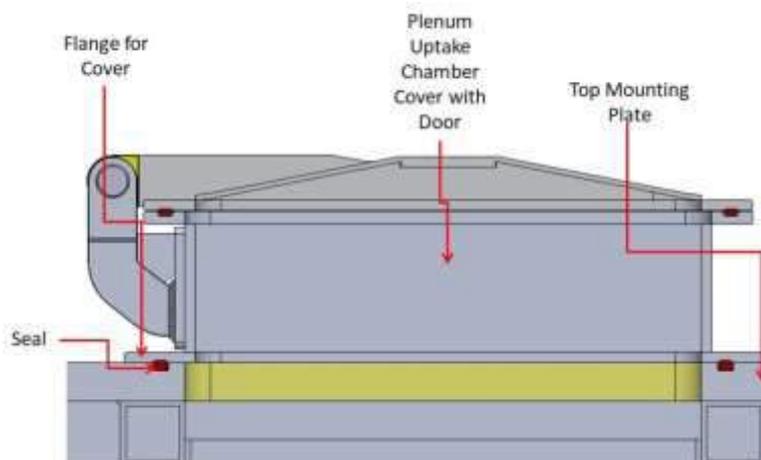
Canister flange interface with top mounting plate (close up view)
